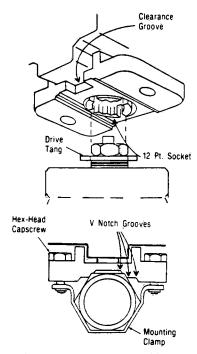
PNEUMATIC ACTUATOR REASSEMBLY.
